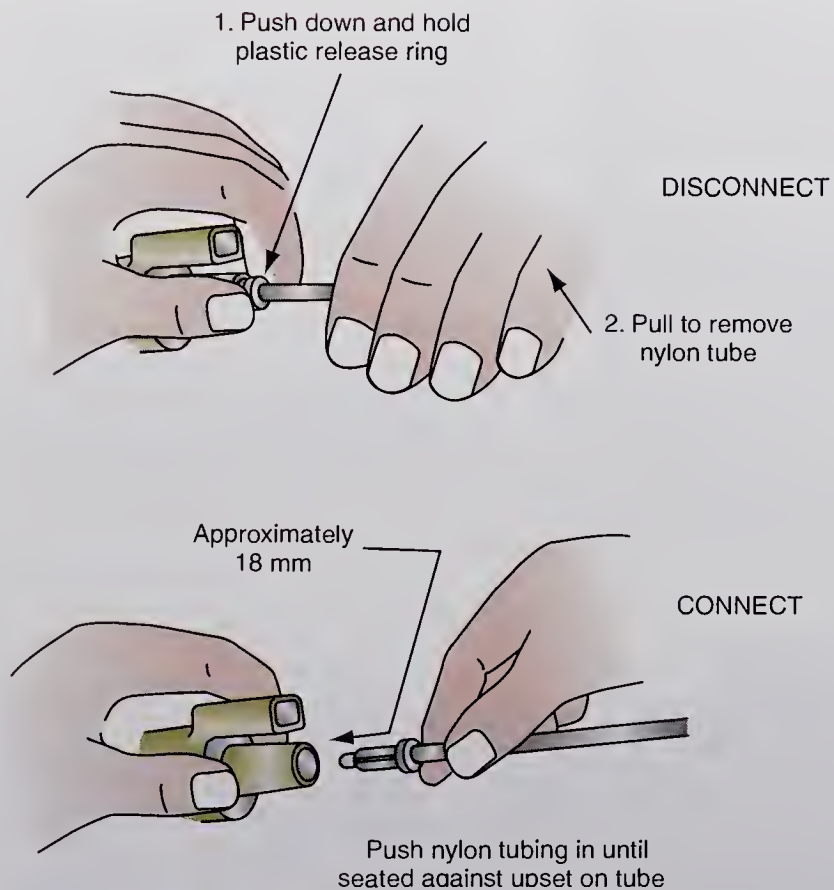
Air line removed from the air spring valve or compressor outlets.
